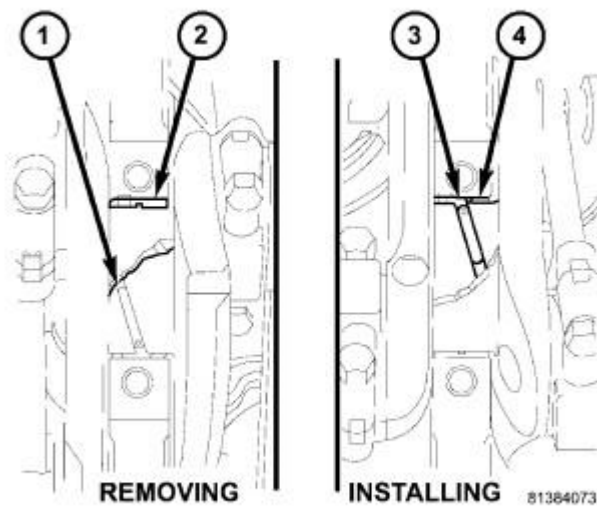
Removing and Installing Upper Main Bearing With Special Tool C-3059A
